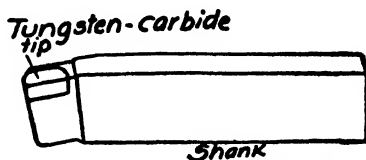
Tungsten-carbide Tipped Lathe Tool with Forged Steel Shank.
